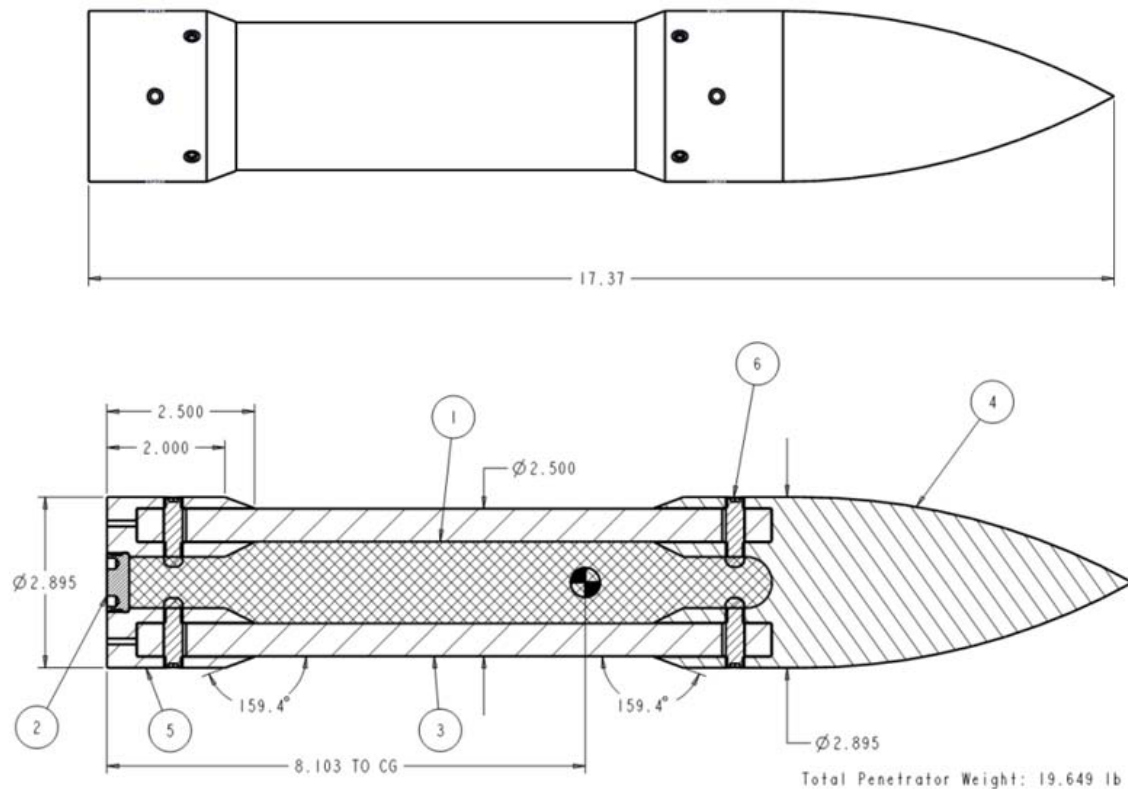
RMS penetrator design showing bolted interfaces.
